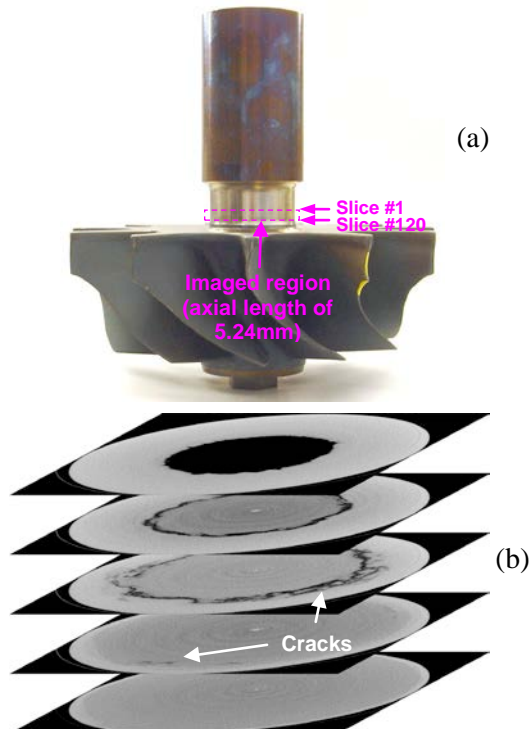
(a) Welding sample #2 and (b) typical x-ray CT slices around weld interface.
